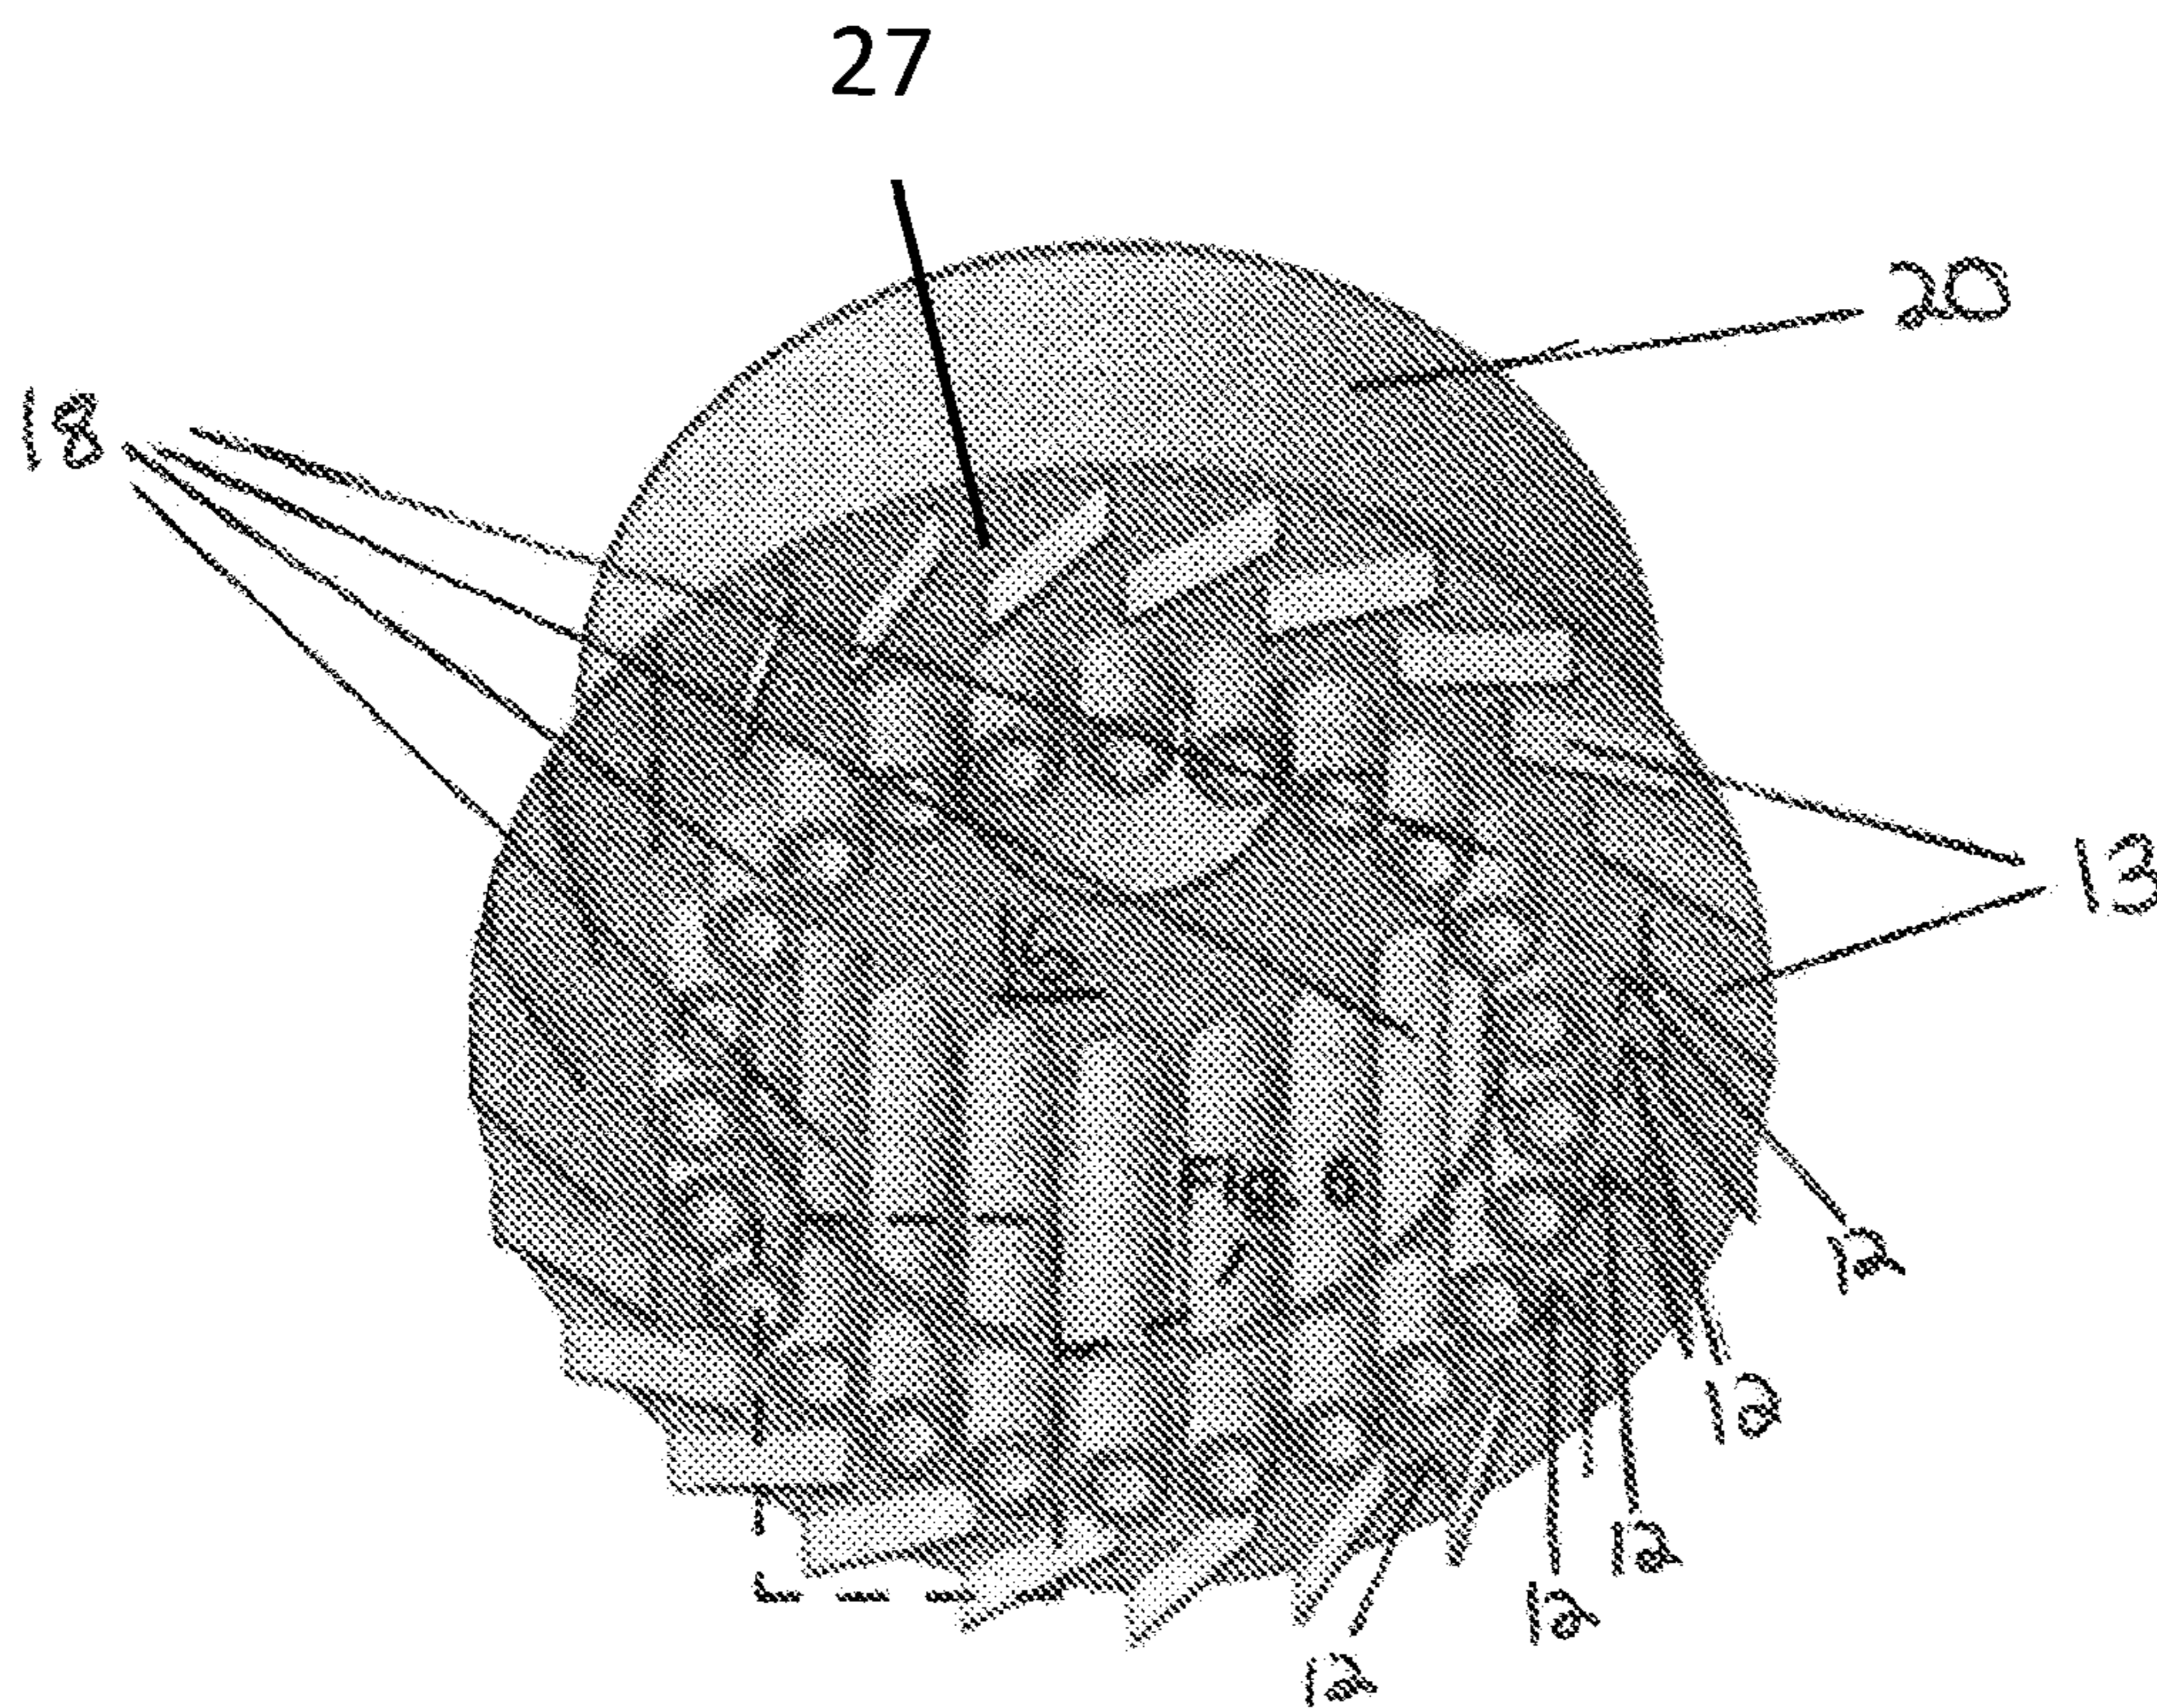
A PERSPECTIVE BOTTOM VIEW OF AN EMBODIMENT
